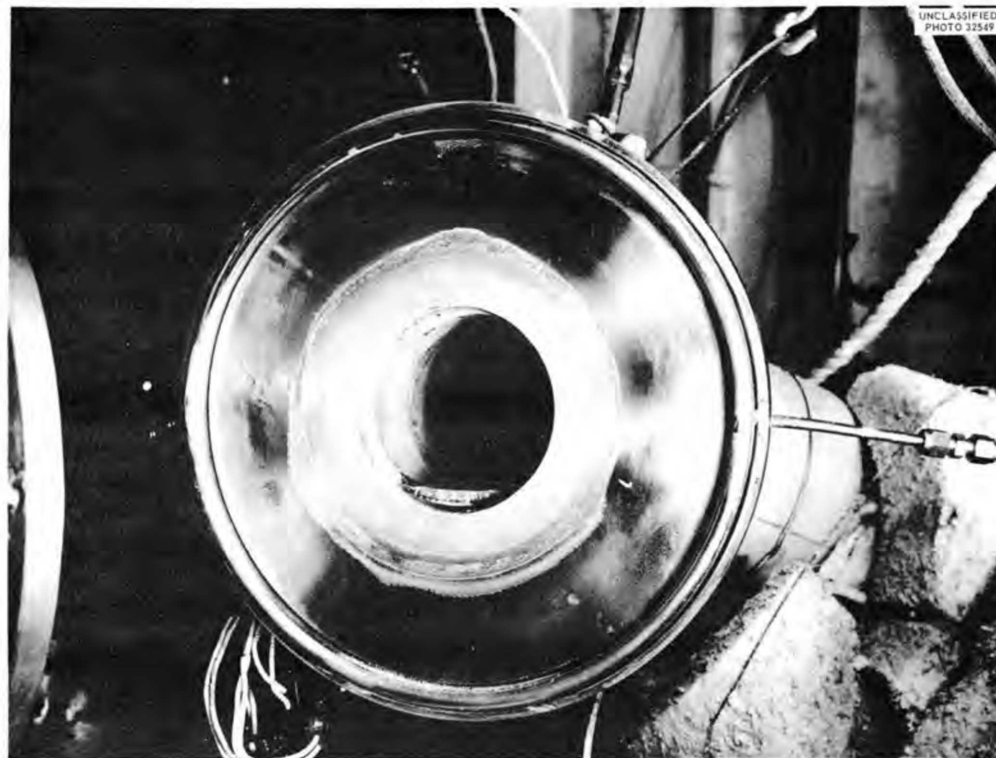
Disassembled Freeze-Flange Joint After Removal of Frozen Salt Seal and Screen.
